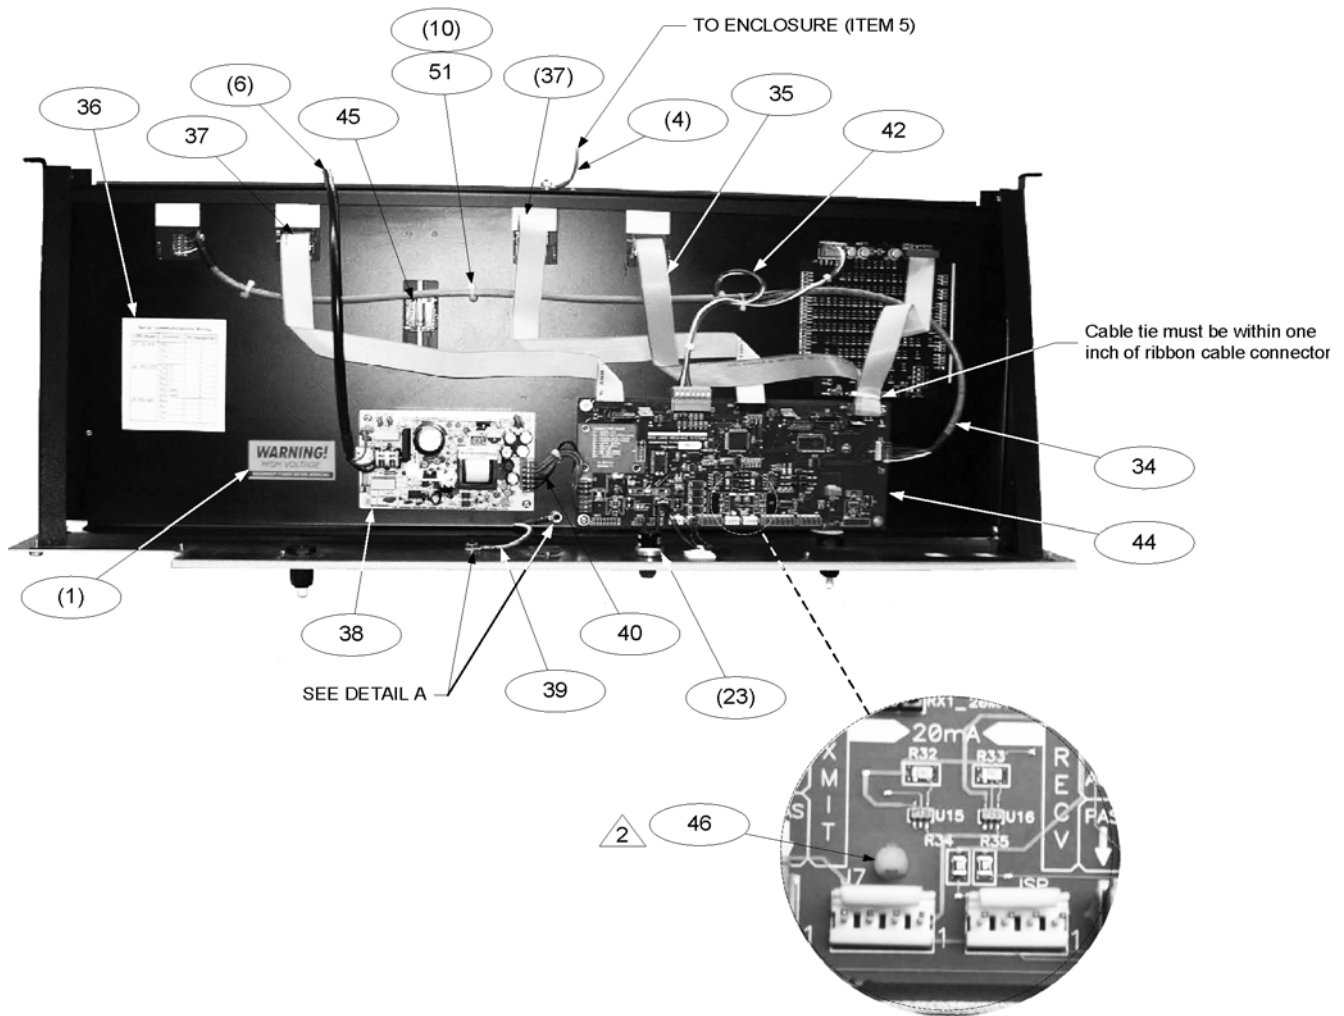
7-Segment Replacement Parts - 6" Assembly
